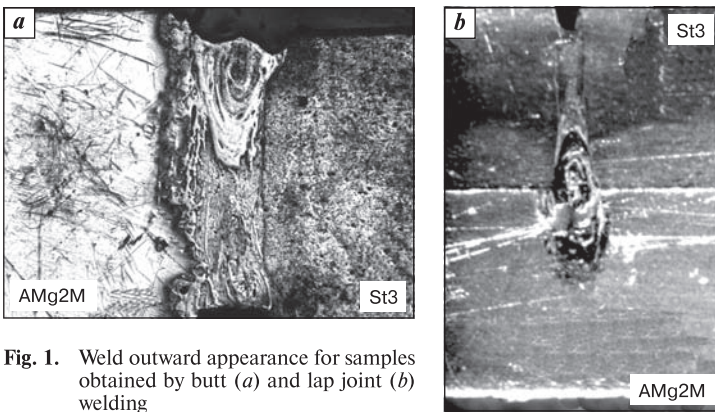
Weld outward appearance for samples obtained by butt (a) and lap joint (b) welding
